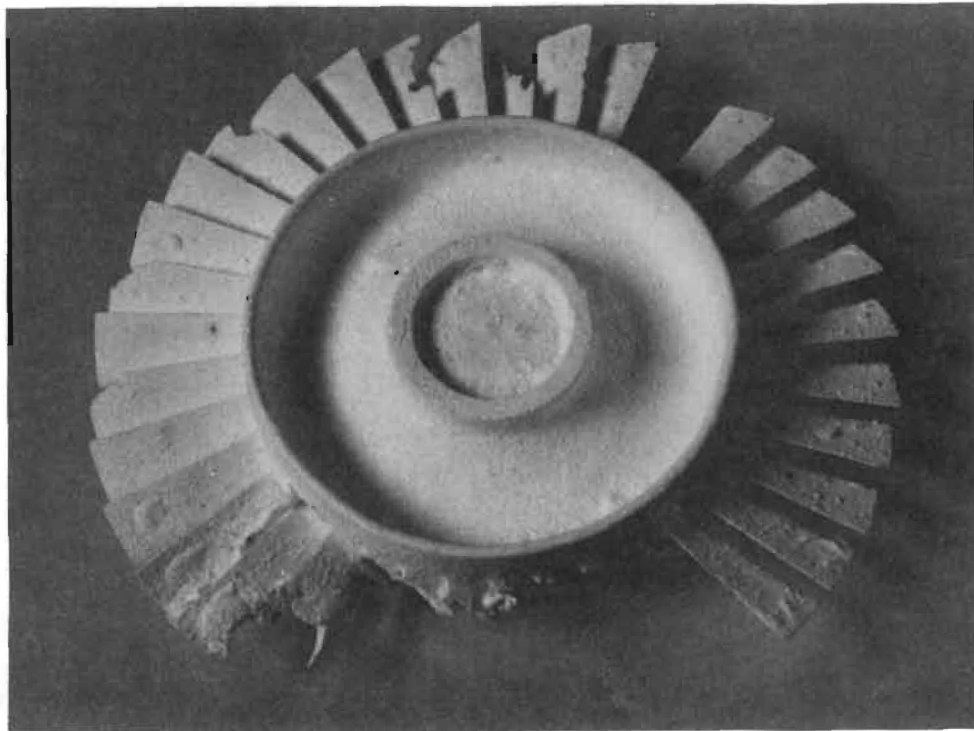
Fused Silica Test Casting Showing Rough Surface Obtained.
